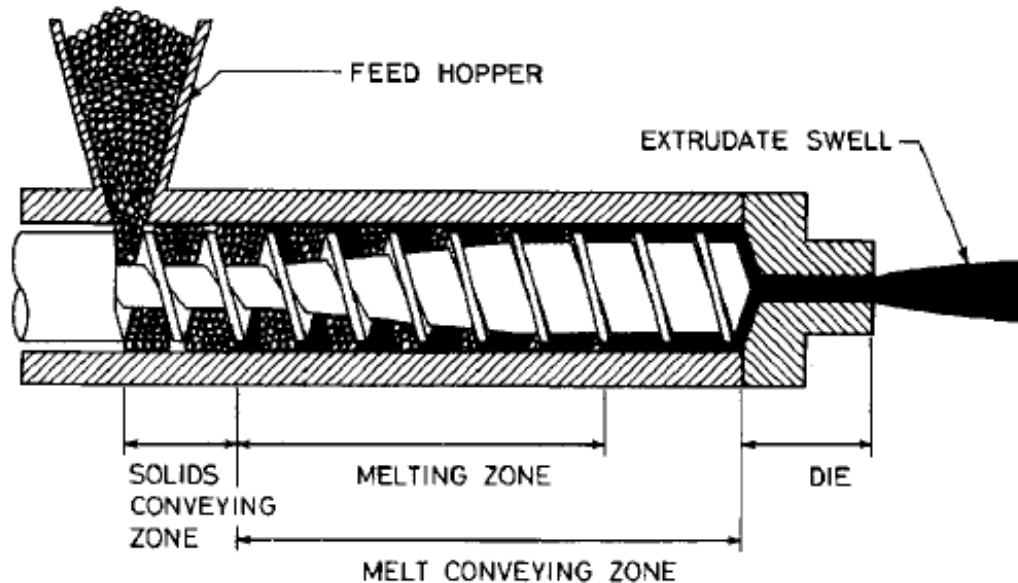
General Layout of Single Screw Plasticising Pellet Extruder
